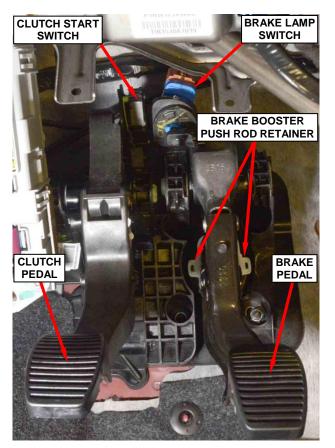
Electrical Connectors and Brake Booster Push Rod
